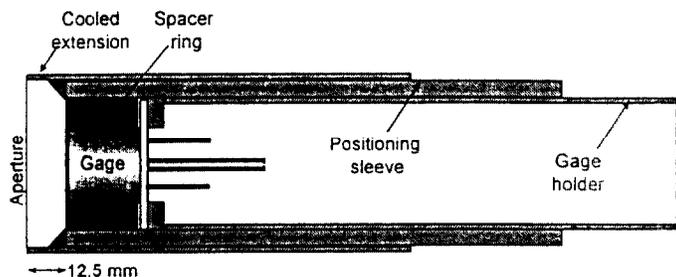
Water cooled extension and gage housing for the spherical blackbody.
